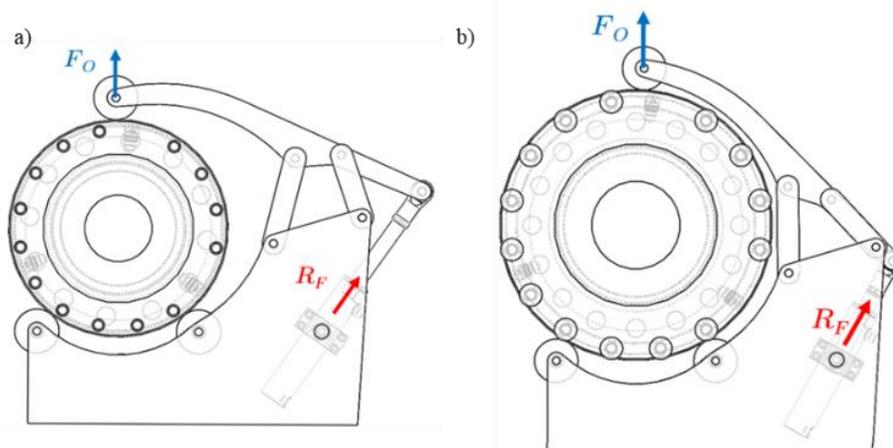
Projection of the tool anchored to the end-fitting. a) End-fitting with 495mm of diameter; b) End-fitting with 625mm of diameter.
